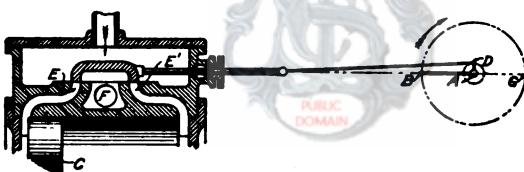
Elementary Slide Valve—Valve in Mid-Position
